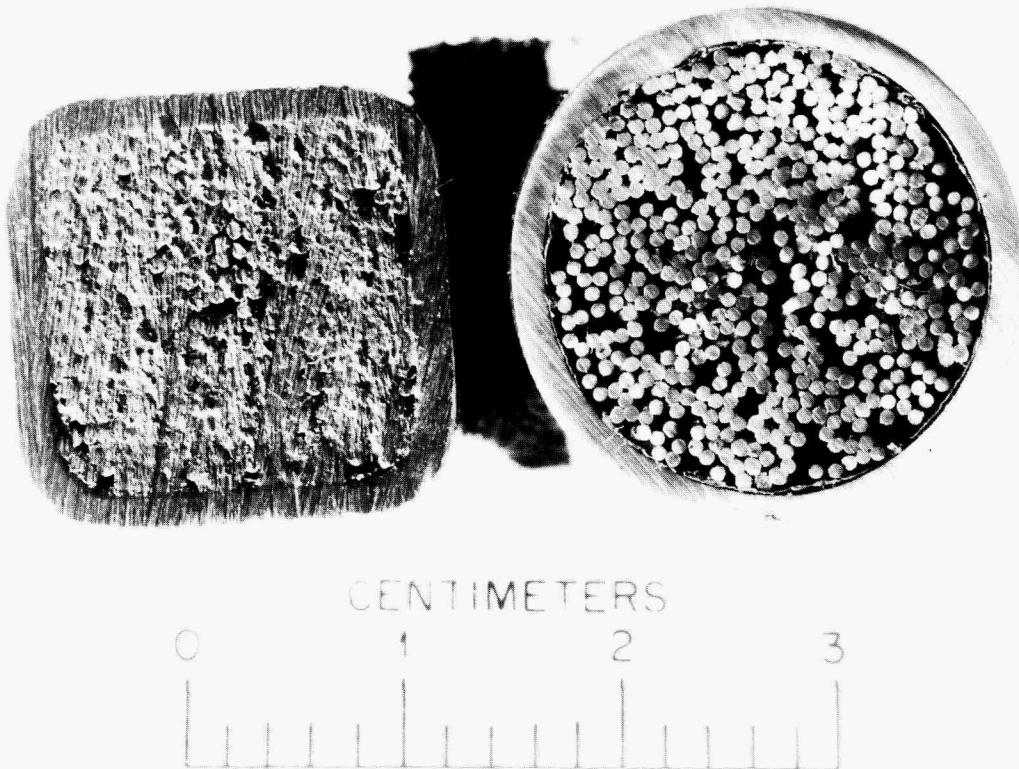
Cross sections of cable. Left, after forming. Right, as welded.
